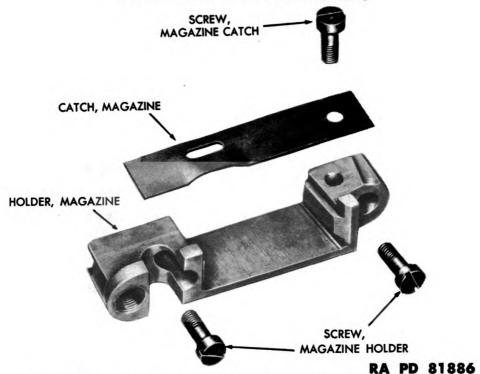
Magazine Holder Group of Winchester Rifle, Cal. .22, Model 75 — Exploded View
